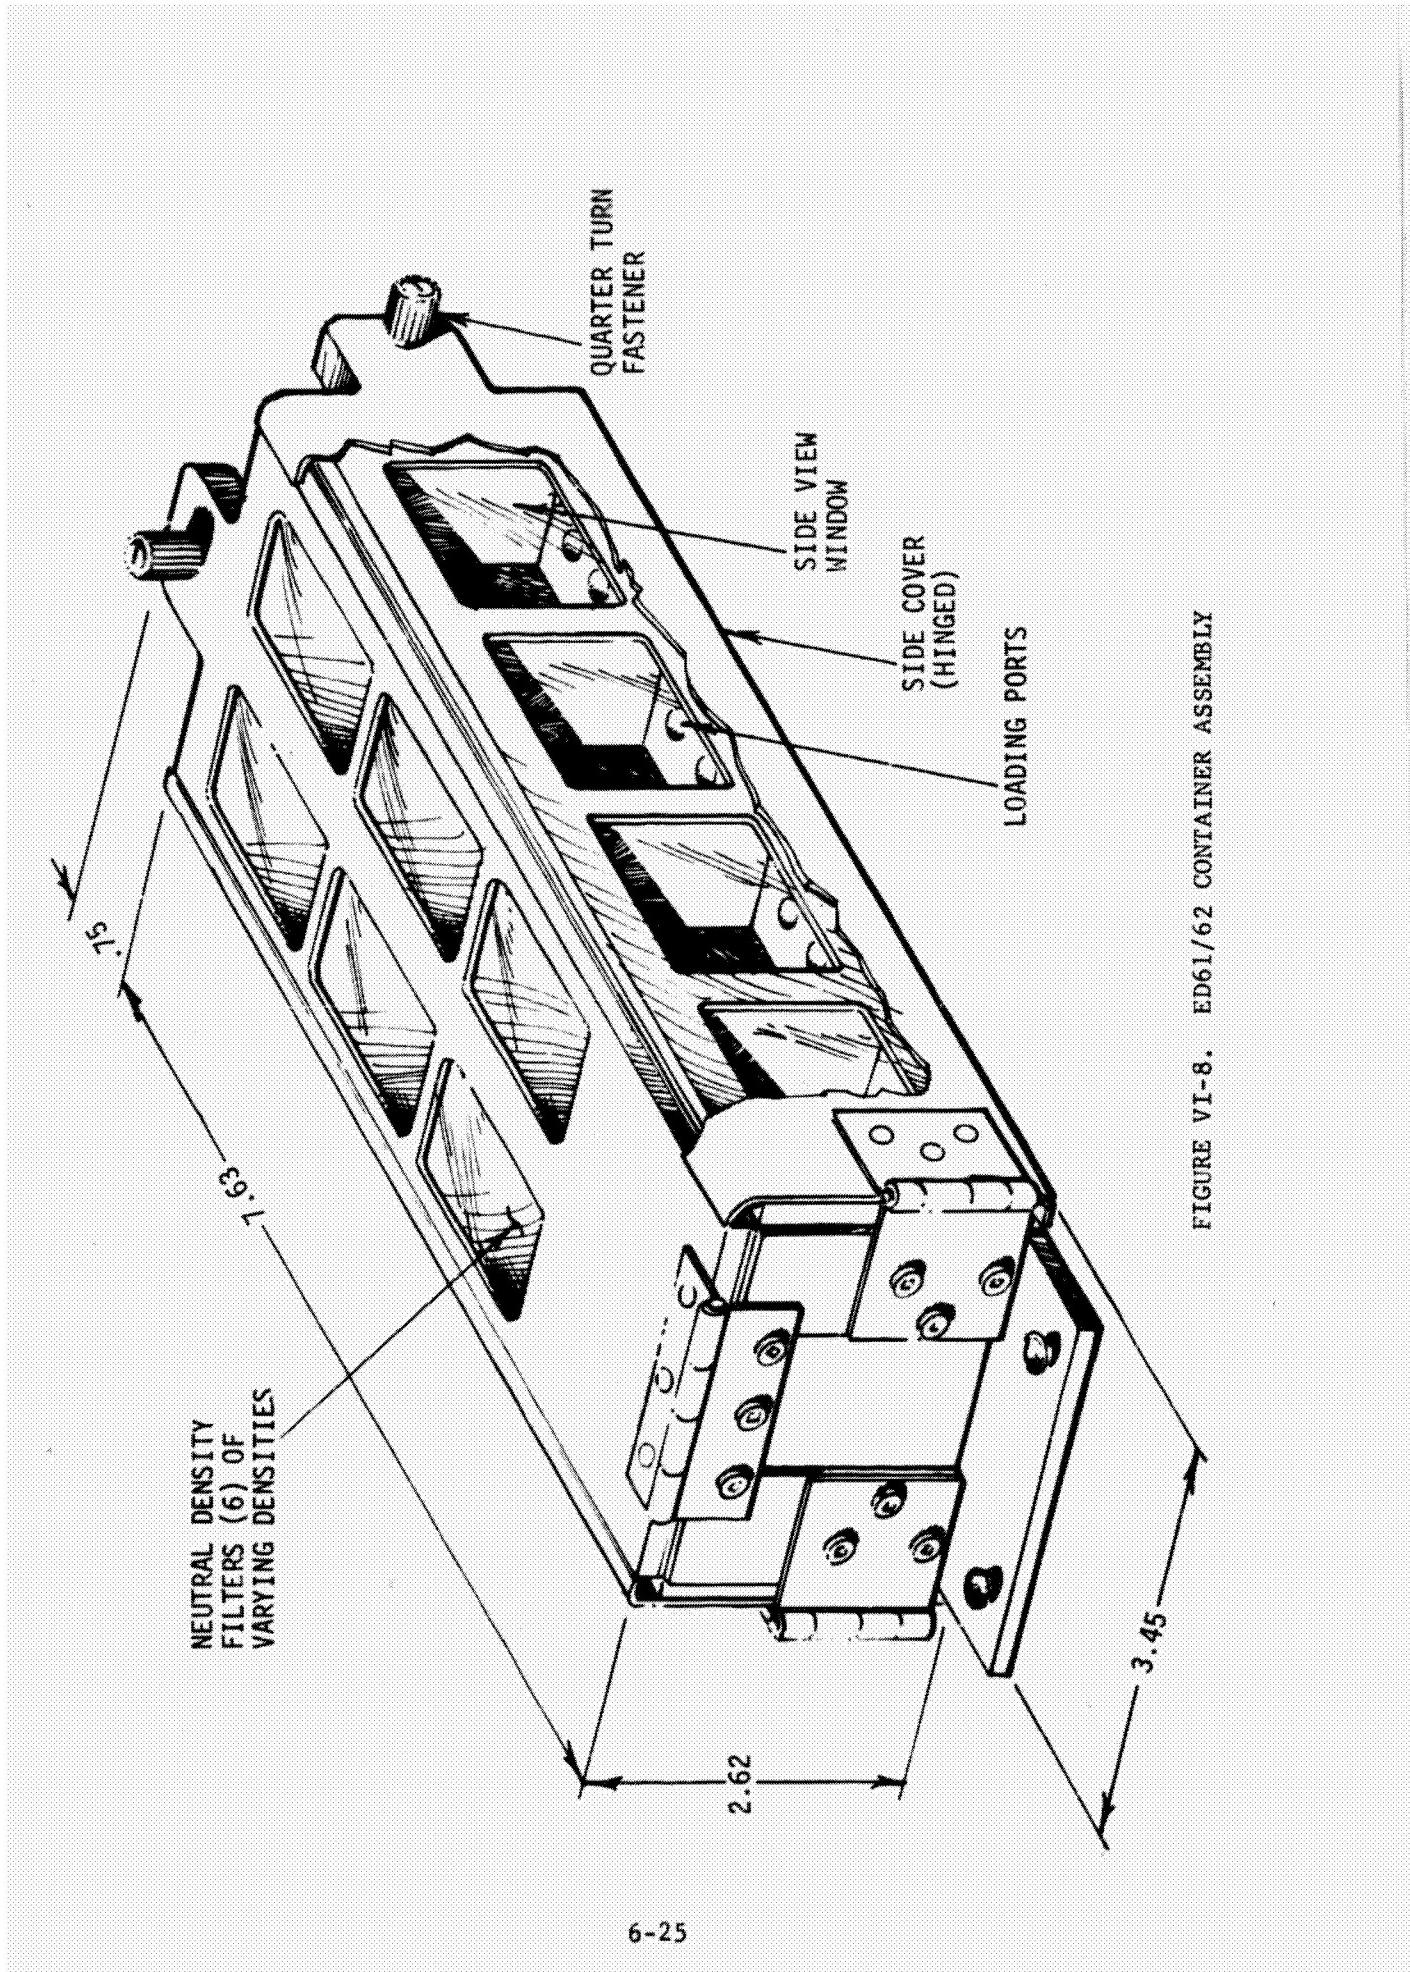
ED61/62 CONTAINER ASSEMBLY
